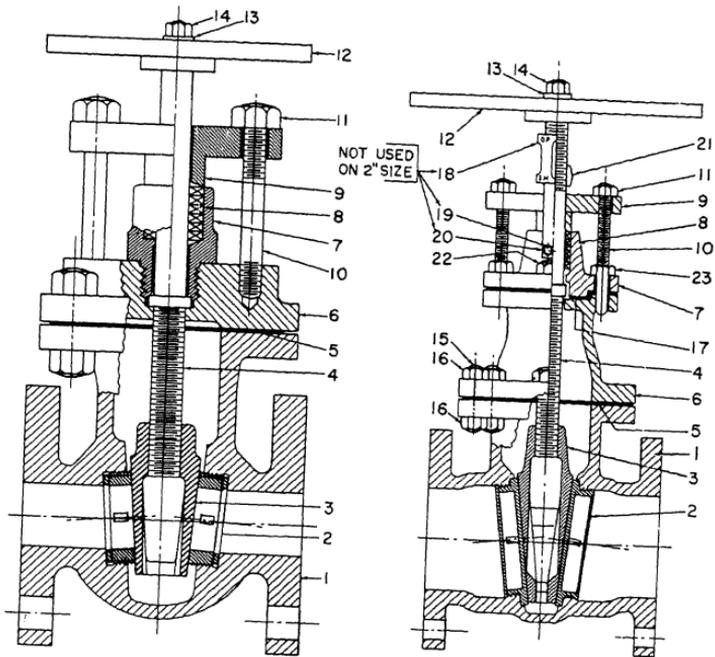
Cutaway view of a gate stop valve (rising stem type).
